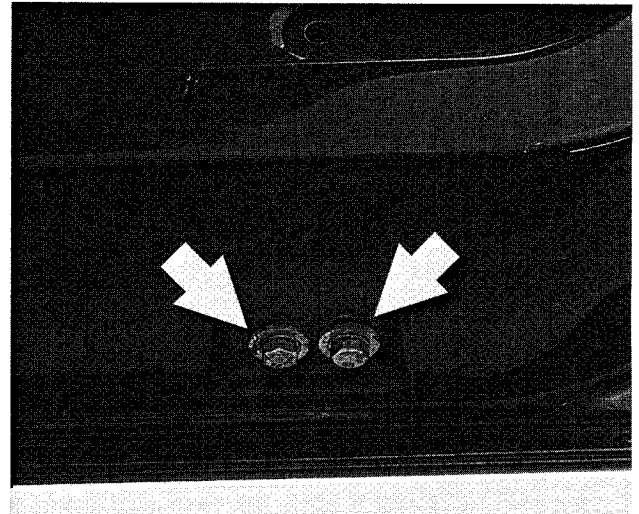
Rear guide rail lower mounting bolts in bottom of door (arrows).
